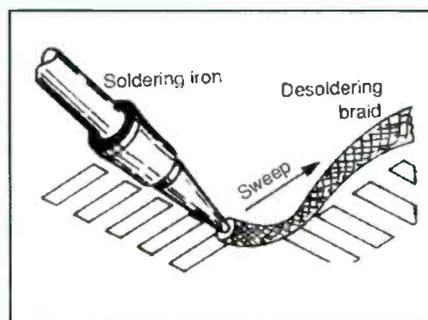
Using a soldering iron and desoldering braid, remove the leads from the board, using a sweeping motion in the direction of the foils.
